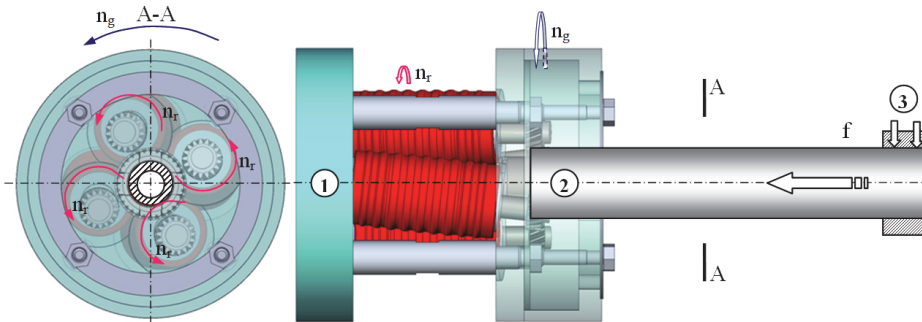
The external thread rolling process schema on bars or pipe by rolling axial head with four rolls: 1 – head, 2 – blank, 3 – grip
